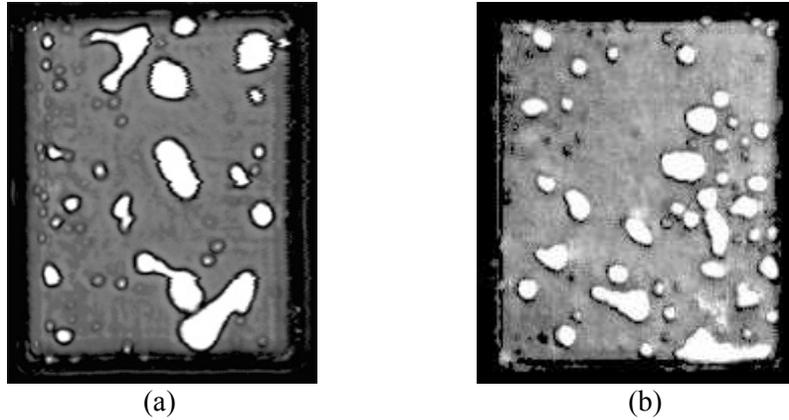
The initial void problems in the reflowed die-attaching solder layers (a) lead-tin solder and (b) lead-free solder.
